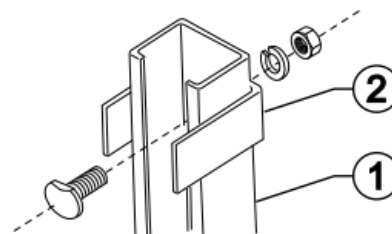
End Stop Assembly (Stainless) - Ungated End Stop (P/N 506312)
